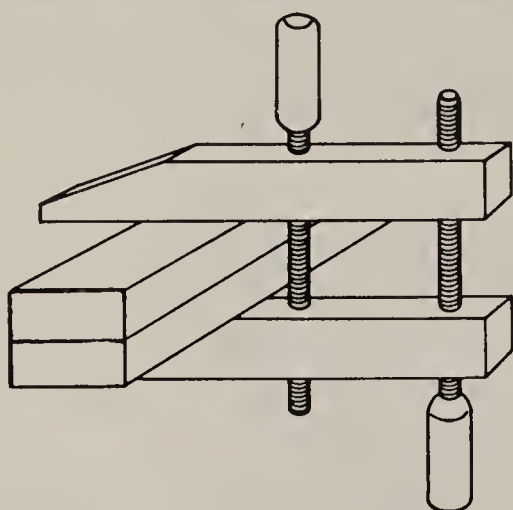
Typical hand screws for clamping boards and blocks together after gluing.
